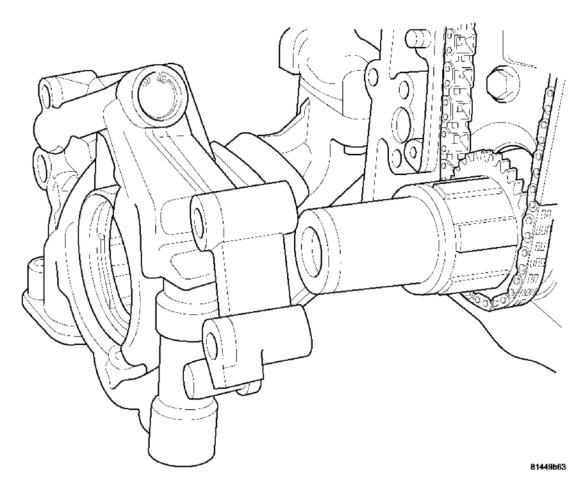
Removing/Installing Oil Pump Courtesy of CHRYSLER LLC
